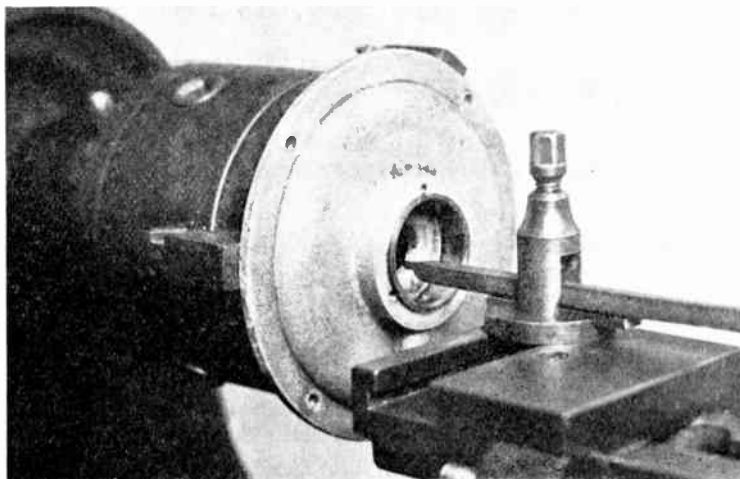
BORING OUT BALLBEARING HOUSING.
